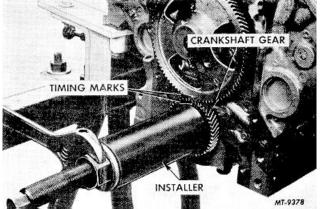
Use of SE-1900 Crankshaft Gear Installer Inspect the crankshaft for cracks, scored, grooved or worn main bearing and connecting rod journals. If the journals show wear or out-of-round in excess of .002", the shaft should be reground and undersize bearings installed or the crankshaft replaced. Use micrometers for checking.
